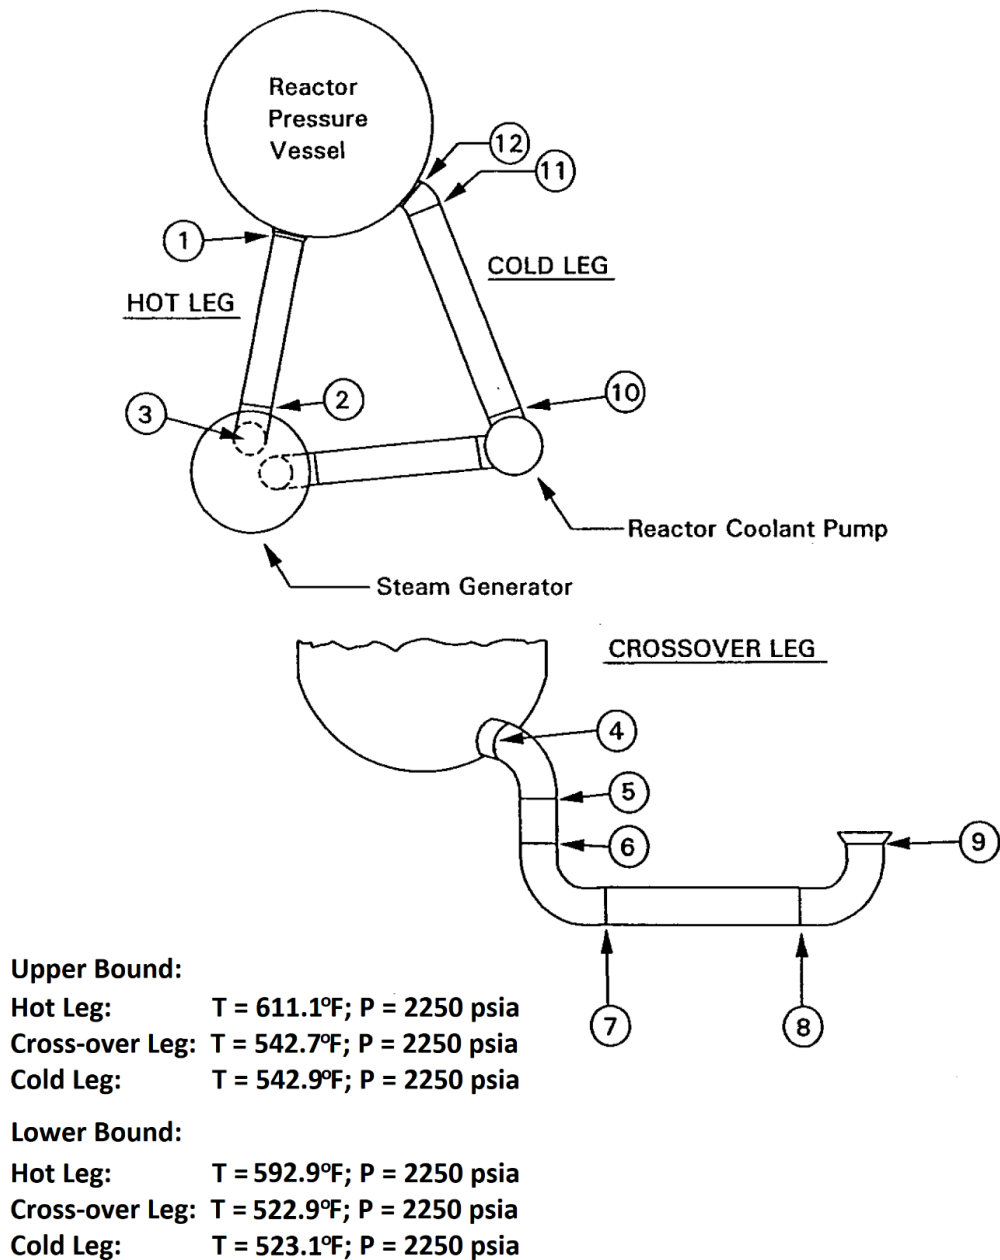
Point Beach Units 1 and 2 RCL Weld Locations
